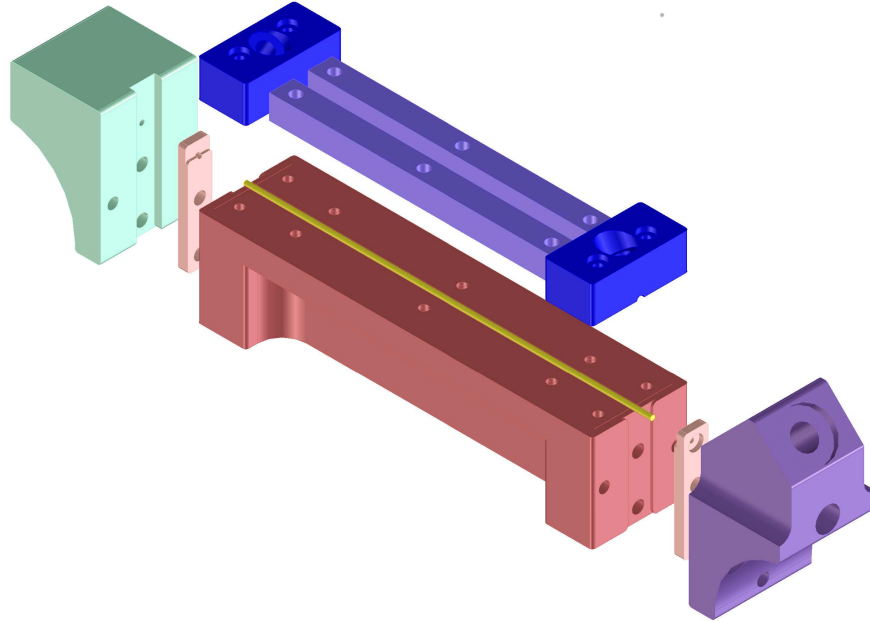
A 3-d exploded rendering of the v-groove fixture
